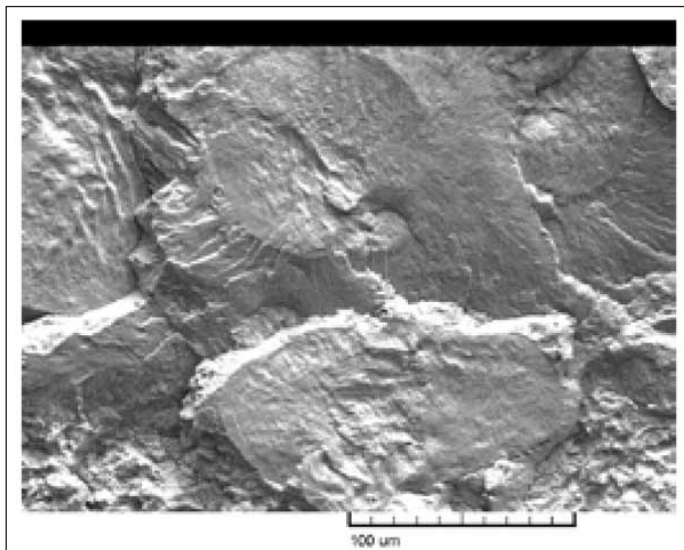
Opened fracture face (cf. Fig. 10a) revealing two cracks (similar to Fig. 9c), surrounded by the CFC structure (scanning electron microscope fractograph, backscattered electron mode).
